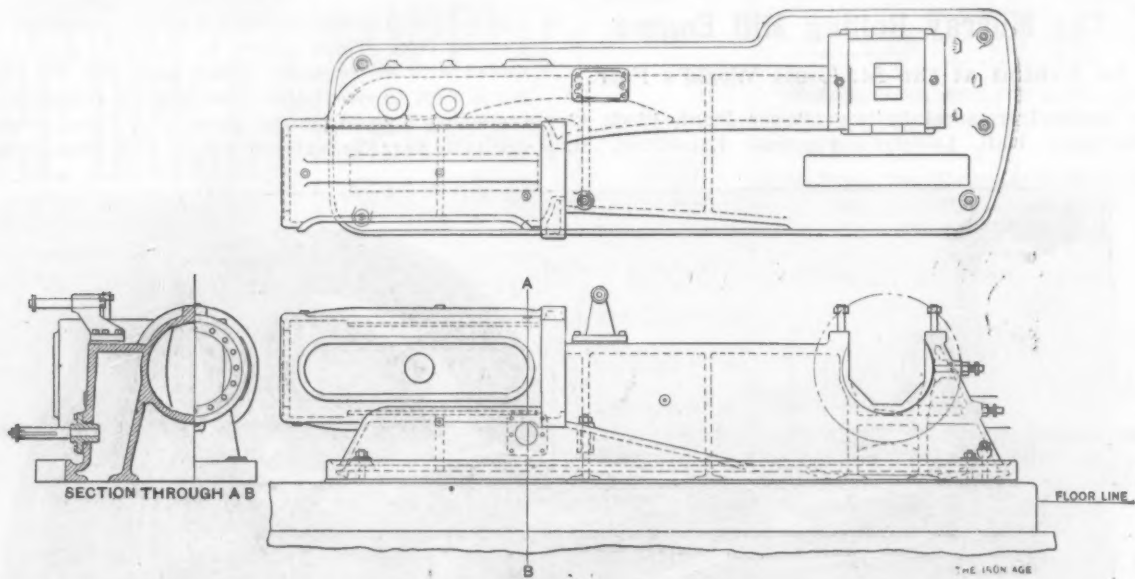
Plan, Elevation and Cross Section of the Bed Plate.
